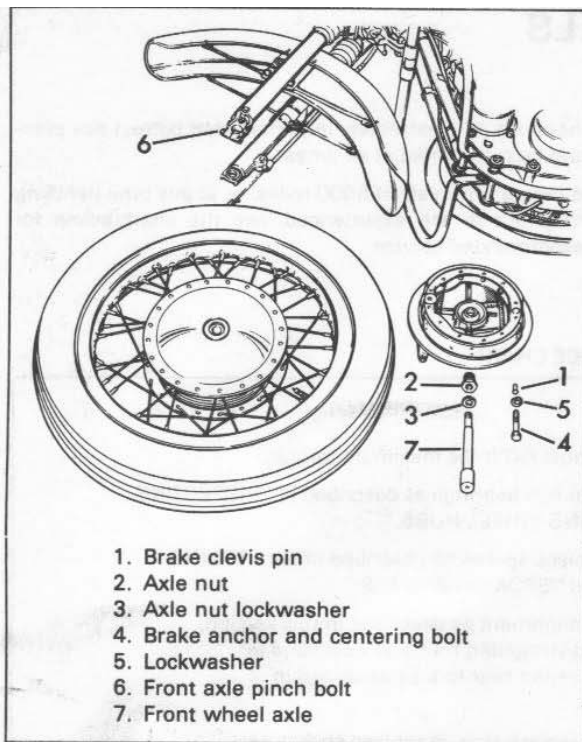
Front Wheel Removal (1972 and Earlier)
